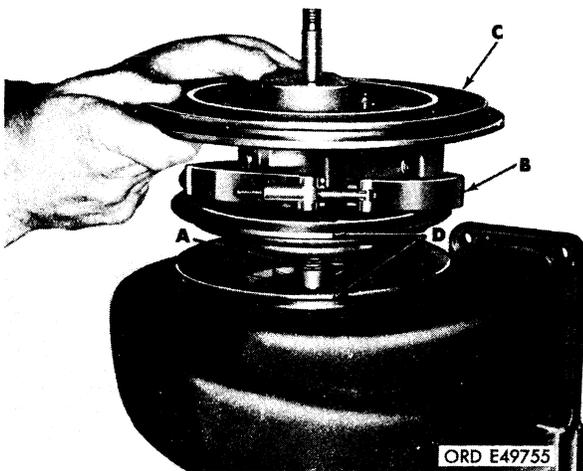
POSITIONING BEARING HOUSING ON TURBINE HOUSING - TURBOCHARGERS 10912638 AND 53591-C-139552.
